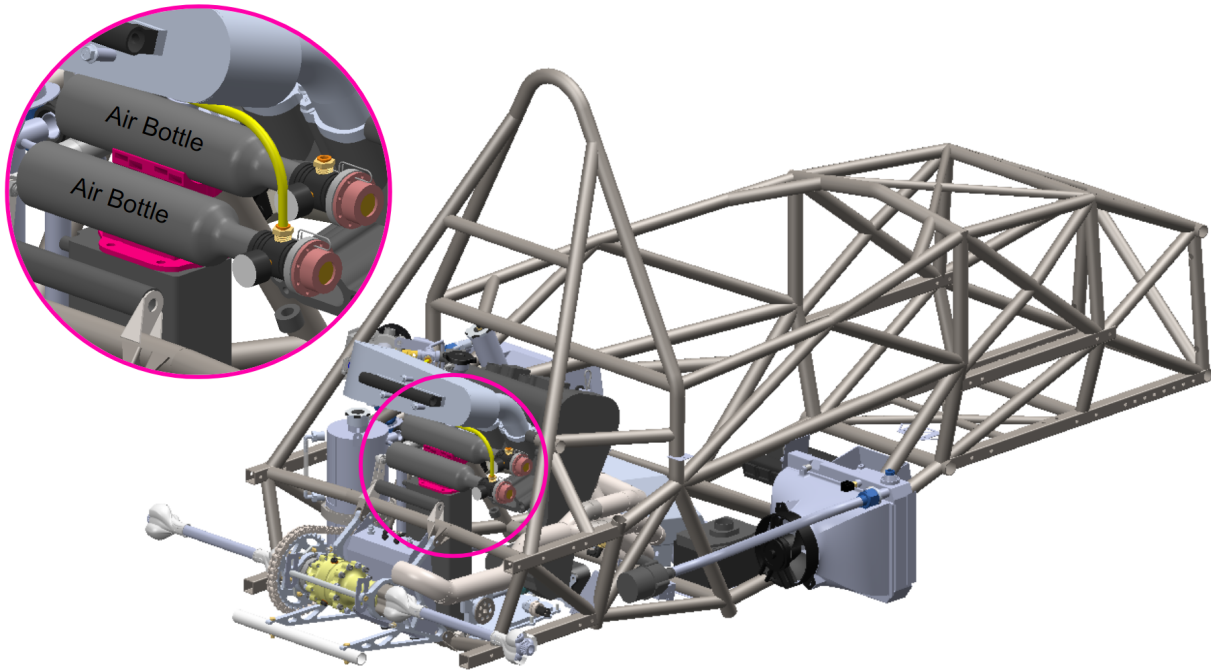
Air bottle mount (highlighted in pink) location on the combustion car
